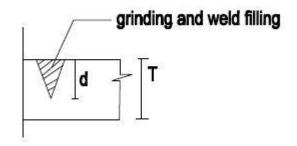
Grinding out the crack along with weld filling.
